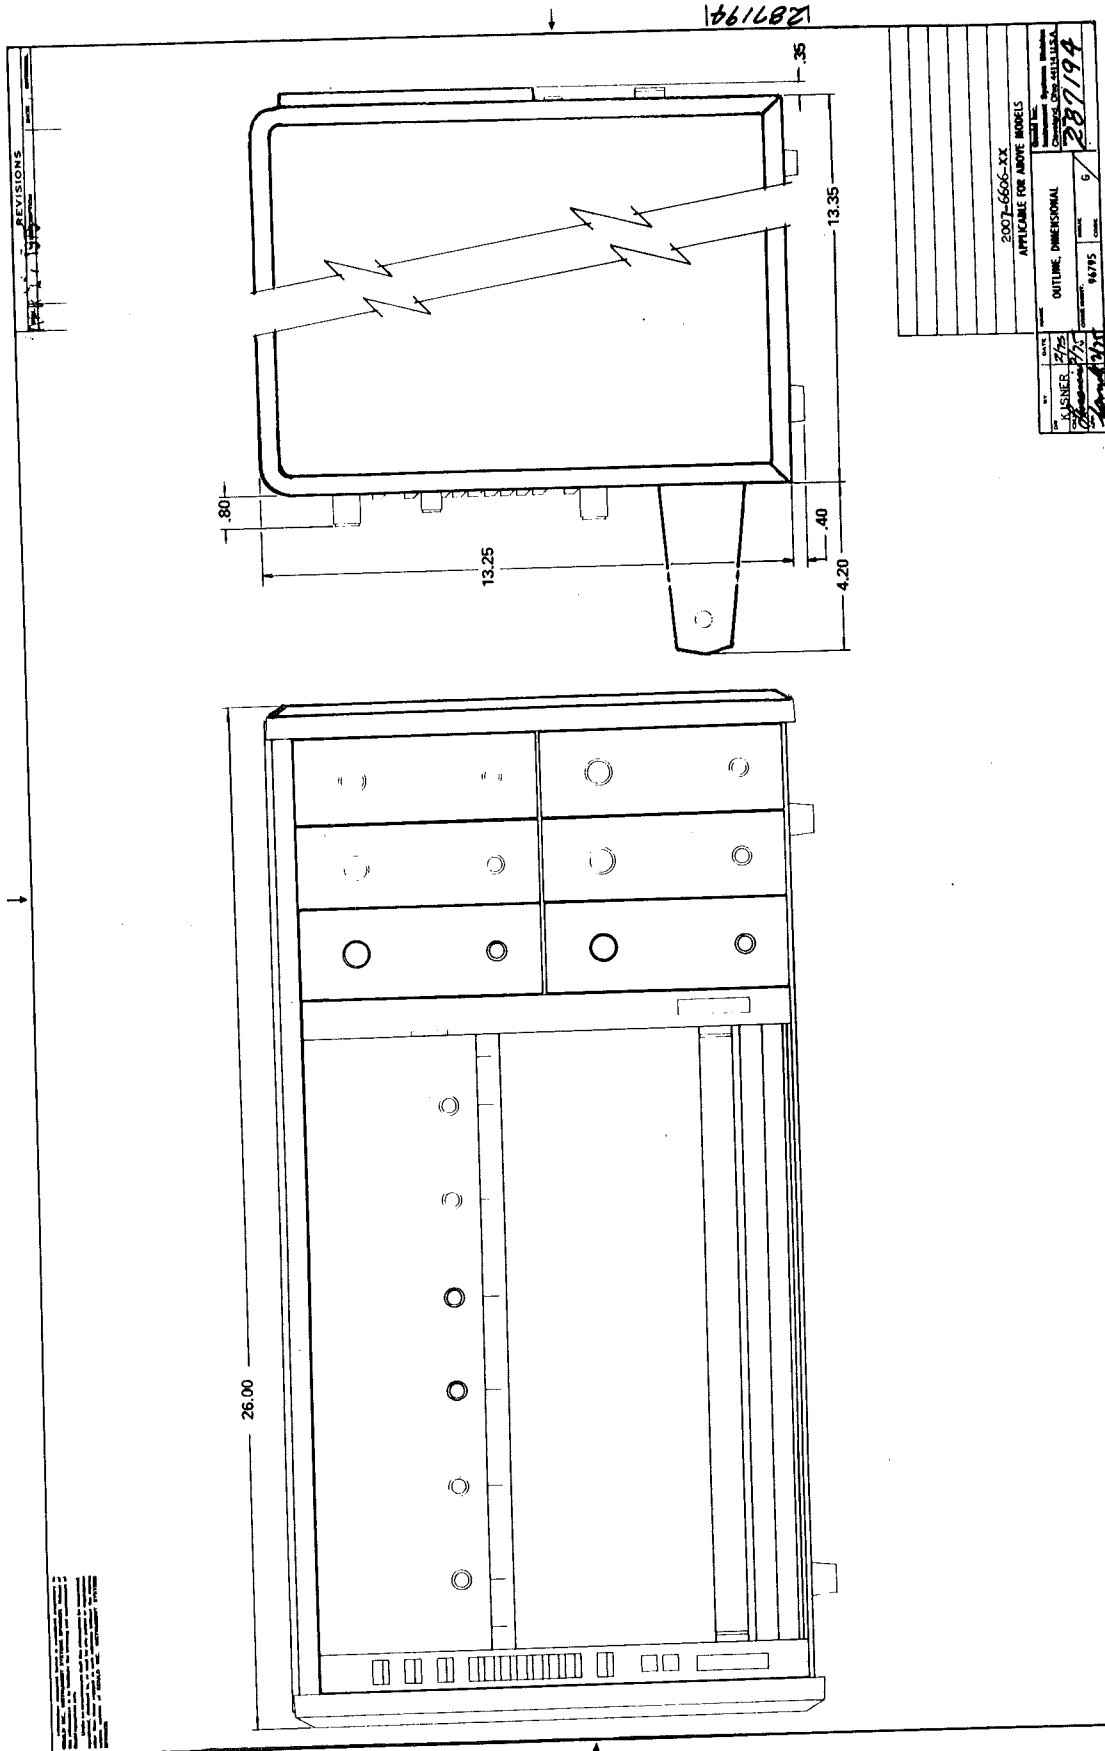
OUTLINE DIMENSIONS - 2600 SERIES WITH 5 or 6 PREAMPS
